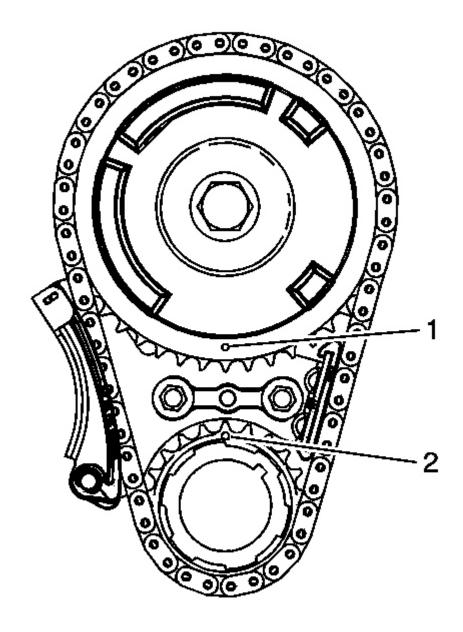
Identifying Camshaft & Crankshaft Sprocket Timing Marks Courtesy of GENERAL MOTORS CORP.
